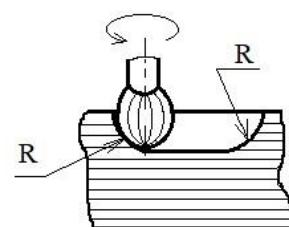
Milling scheme of the defective area of the A/C PCM component, where R is the mill radius
